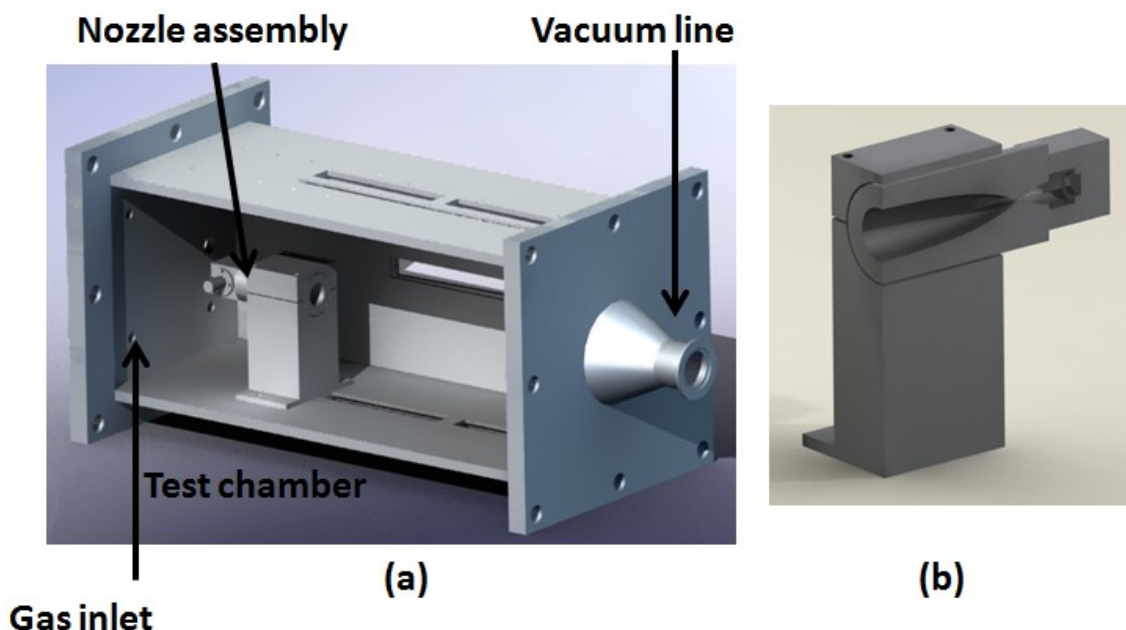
RPHT Cell original design. The nozzle assembly is placed inside of the main chamber (a). Cross-sectional view of the nozzle assembly mounted in the mounting block (b).
